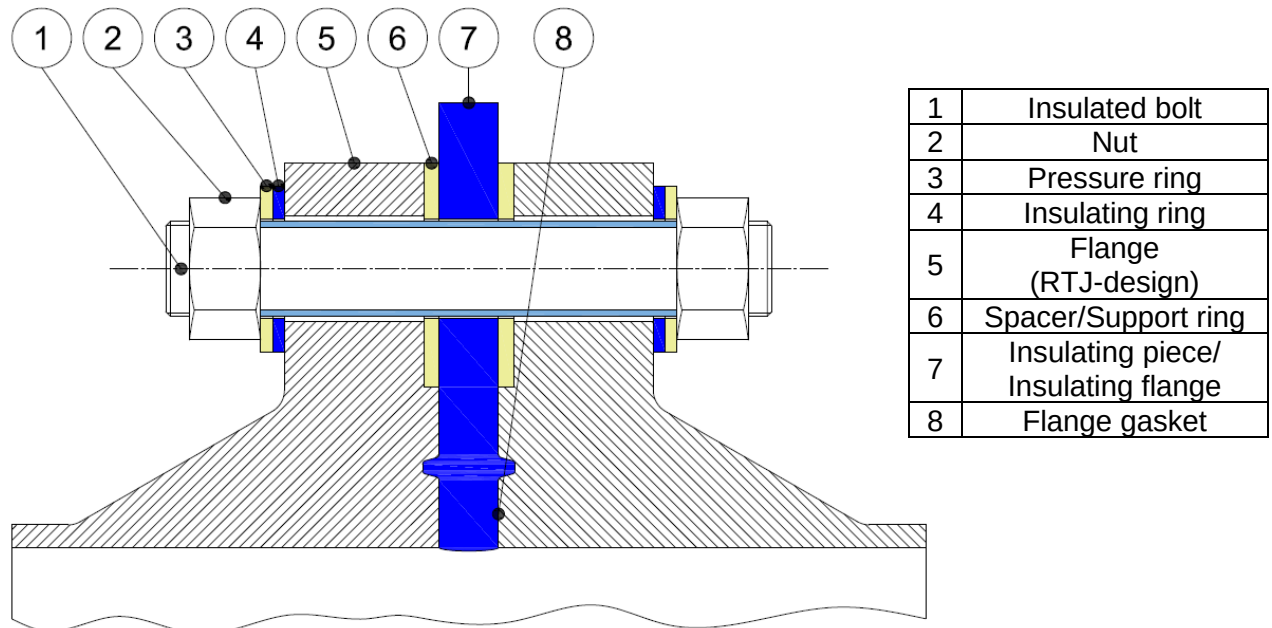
Schematic Structure of Insulating Flange (Assembly)
